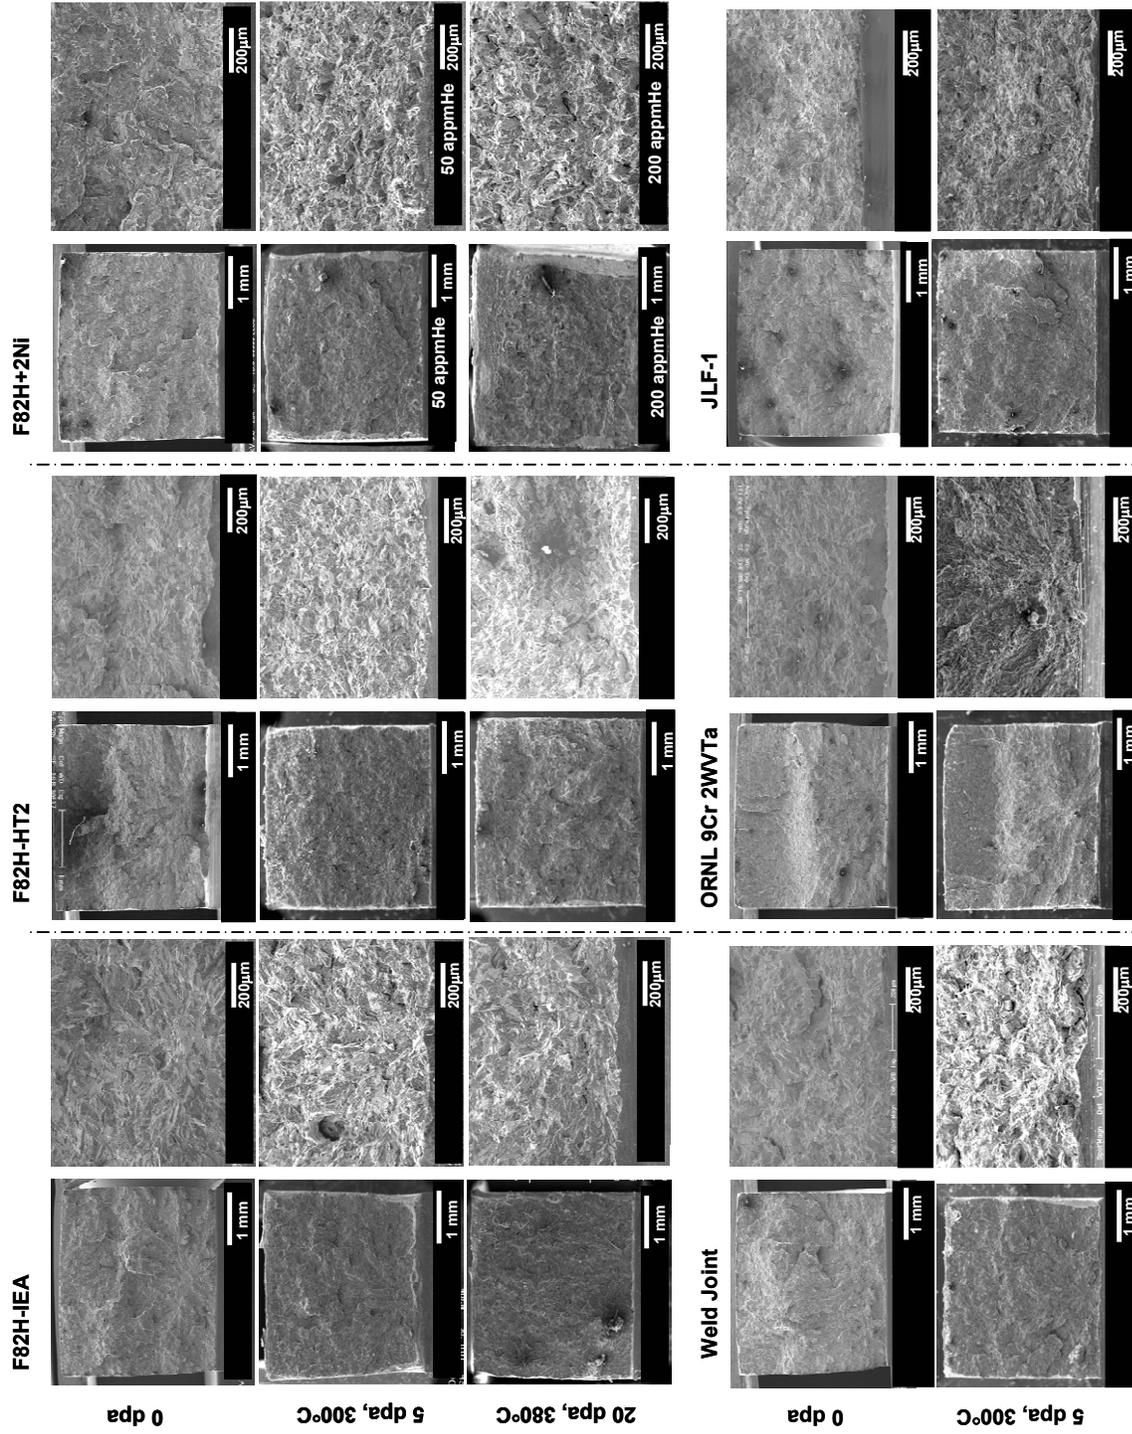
Fracture surfaces of Charpy impact-tested specimens. Right side pictures of each material/ conditions are the magnified images of fracture initiation points
